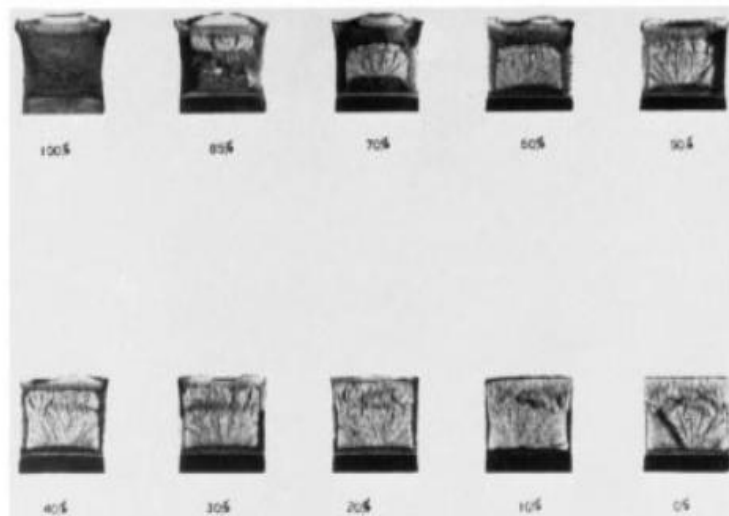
Fracture Appearance Charts and Percent Shear Fracture Comparator
